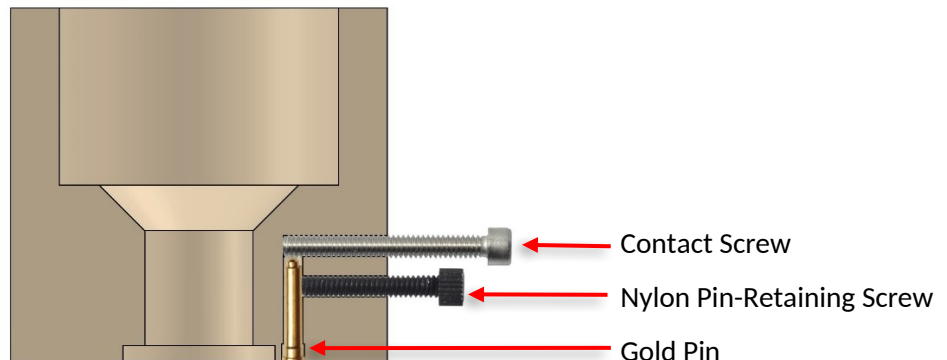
The nylon set screw retains the gold pin in the compressed state.
